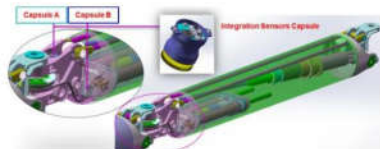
EAMA segment 4 integration sensors capsule mechanism installation.
